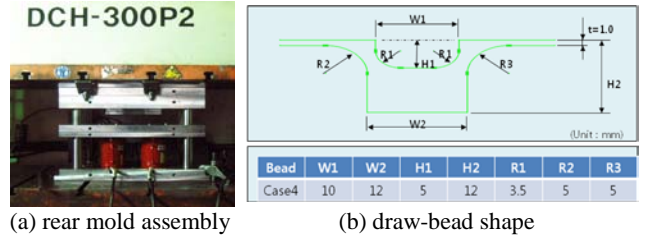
Shape of the rear mold assembly and draw-bead shape
